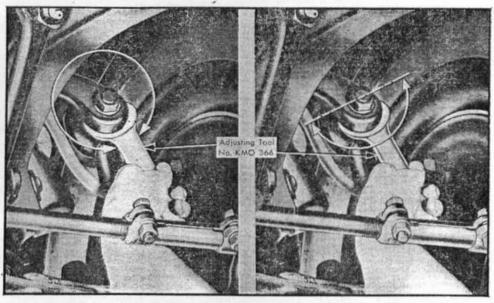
Caster (left) and camber (right) adjustments, 1950-54.
